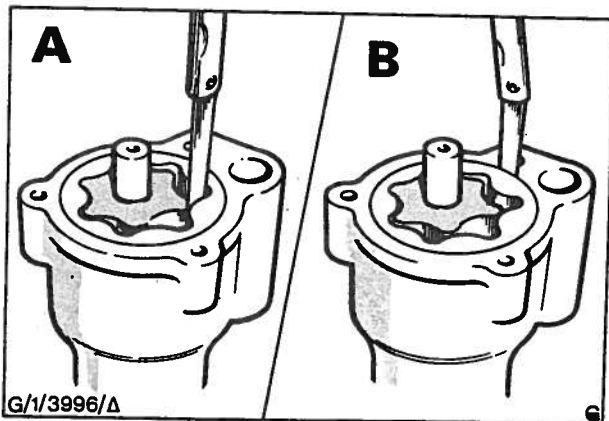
Measuring Rotor Lobe/Body Clearance
